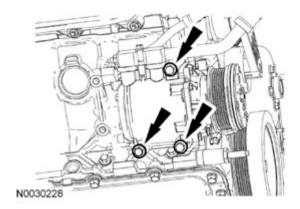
Locating A/C Compressor Aside And Bolts Courtesy of FORD MOTOR CO.
